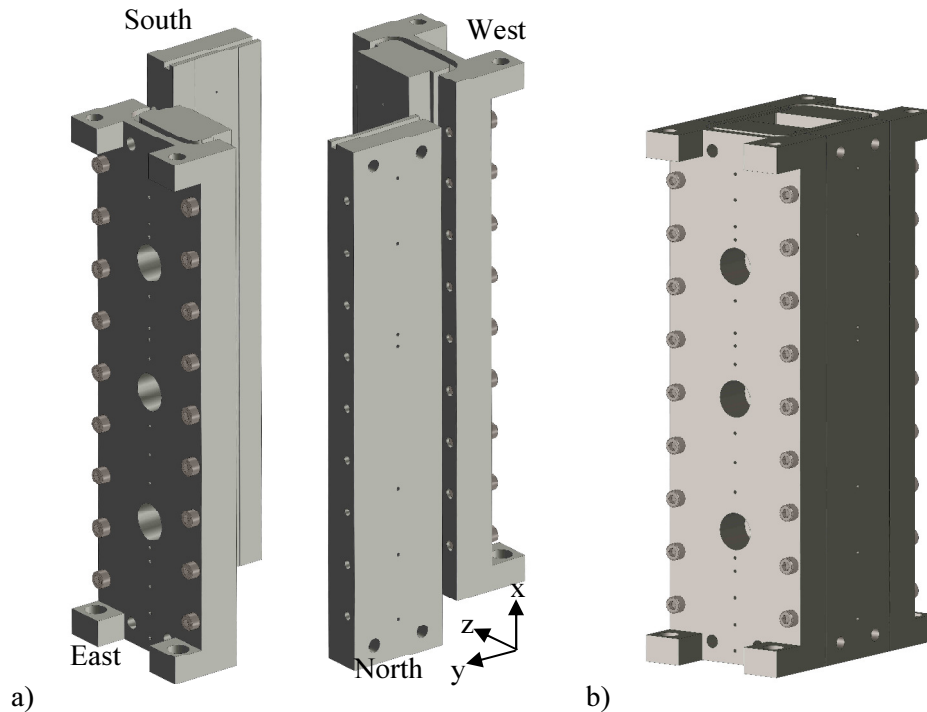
Isolator section solid model: a) isometric exploded view, b) isometric assembly.
